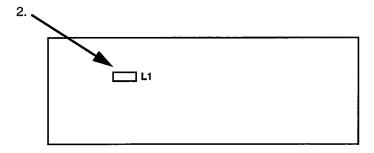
CL-GD7555 Power Supply Module for Demonstration Board (Component Side)
